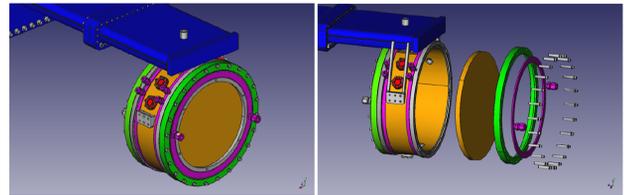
3D model (left) and exploded view (right) of modular cavity.
